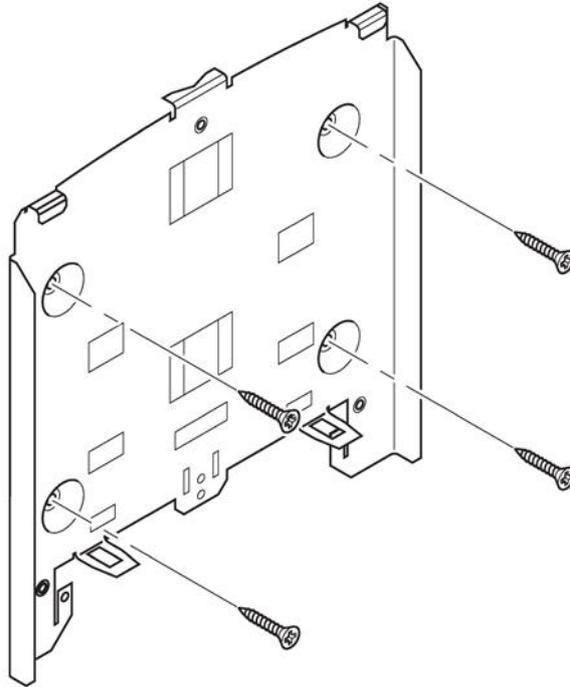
Fitting the mounting plate for the SCALANCE W786 to a wall
